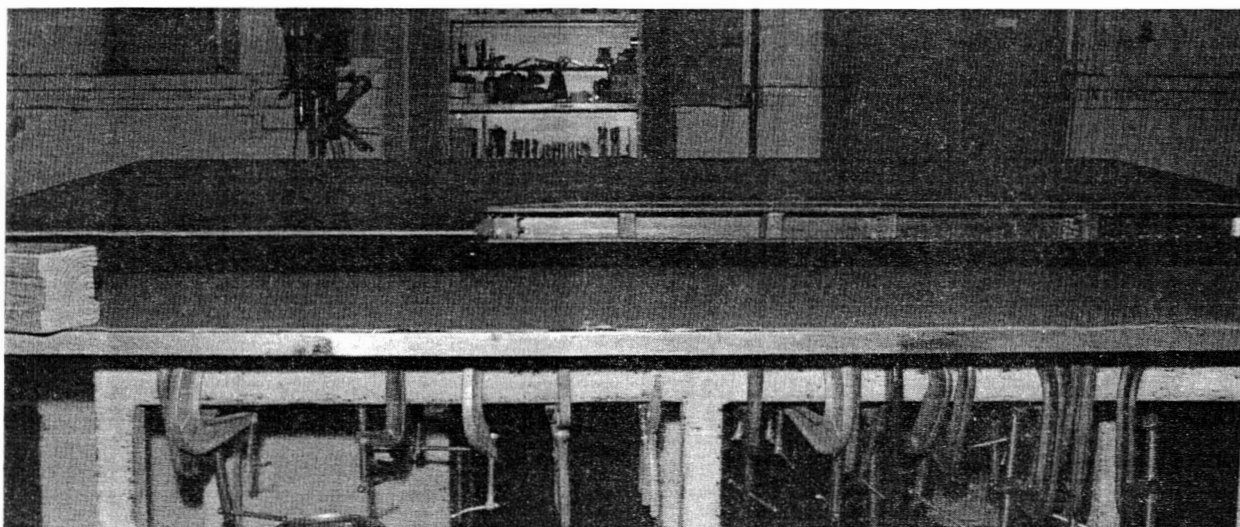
Manufacturing Verification Hardware (Test No. 16) Showing Rear View of Completed Assembly
